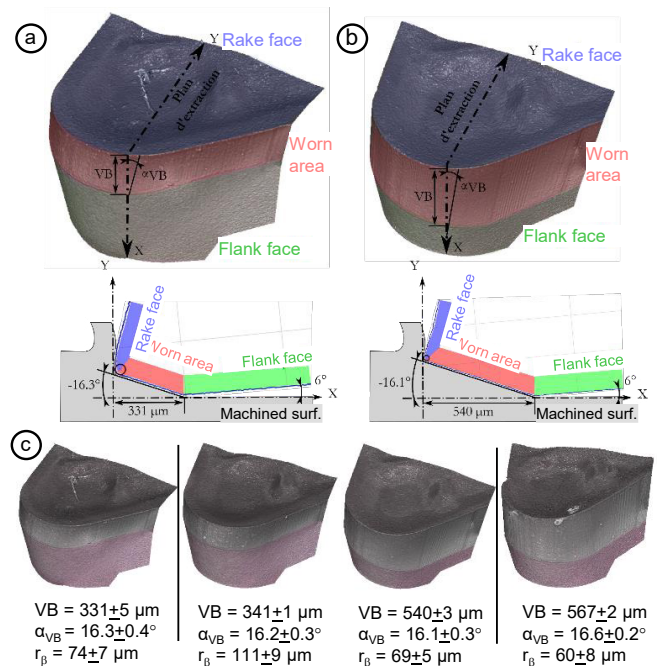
Artificially worn tool geometries: example of 3D topography and local tool profile (a) with a 331µm and (b) 540µm VB flank wear, (c) detailed geometrical features of the 4 generated tools (3D scans performed before the cutting edge preparation).
